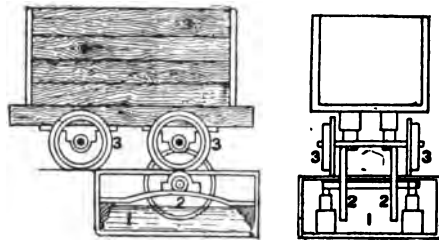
Tram axle-greaser. 1, oil-box; 2, oil-wheels rubbing against axle of tub; 3, wheels and axles oiled when passing over oil-well.
